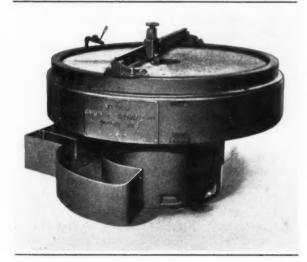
Horizontal Disk Grinder Driven by Vertical Built-in Shaftless Motor
